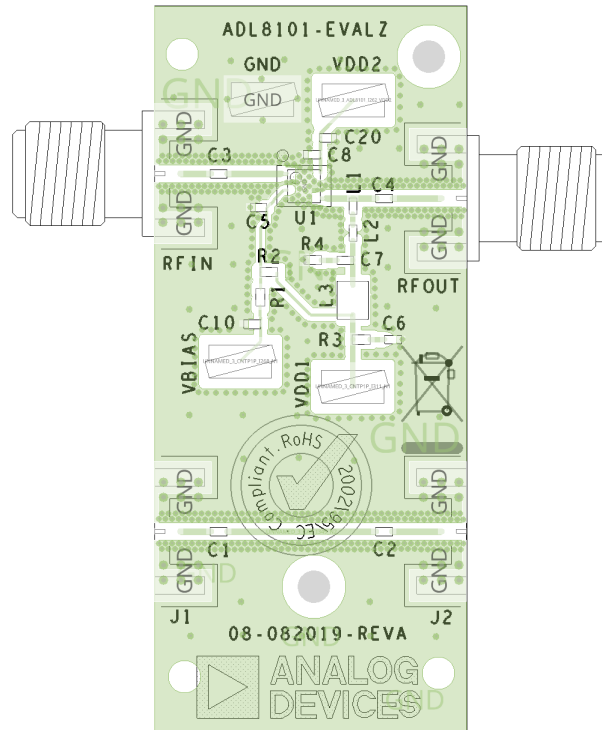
ADL8101-EVALZ Assembly Drawing (J1 and J2 Not Installed)
